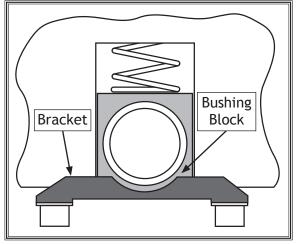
Sawdust can get trapped between the bushing block and the bracket.
